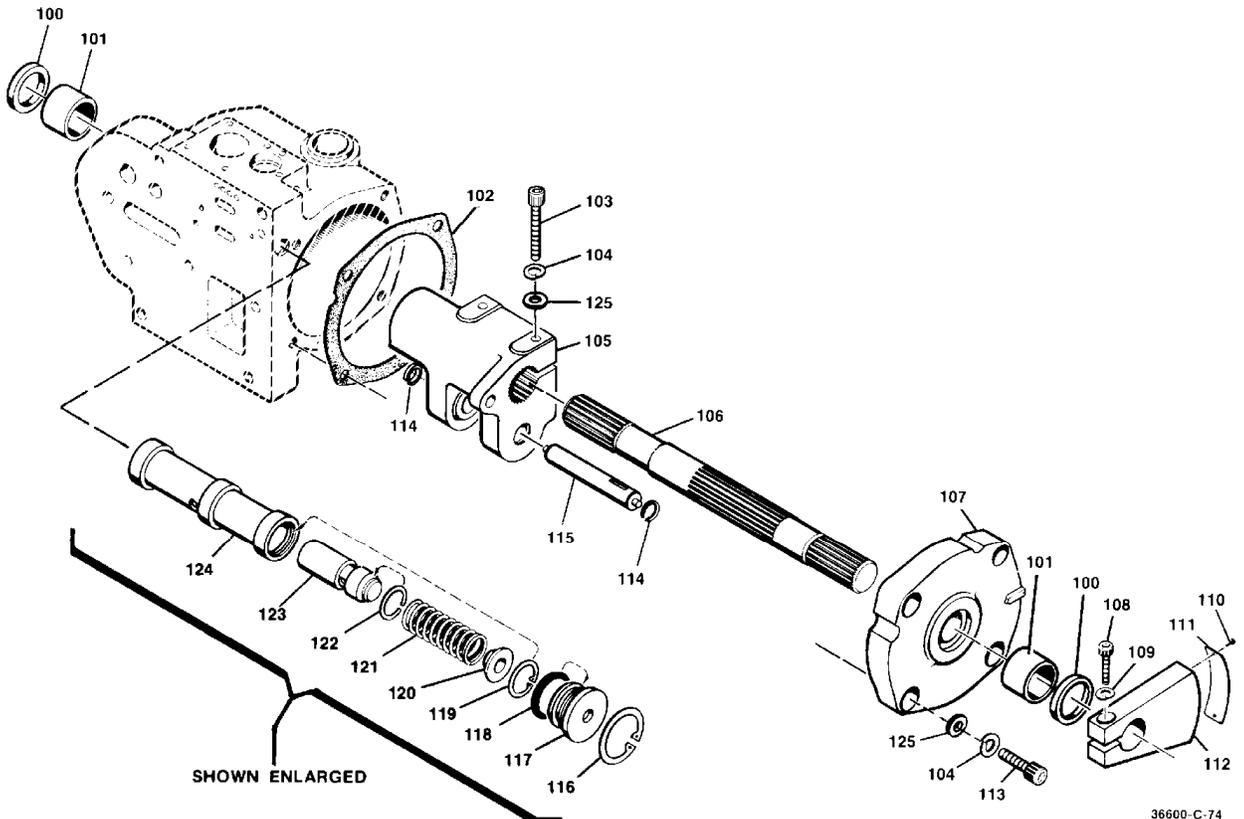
Parts for Power Piston Assembly and Pilot Valve Assembly
